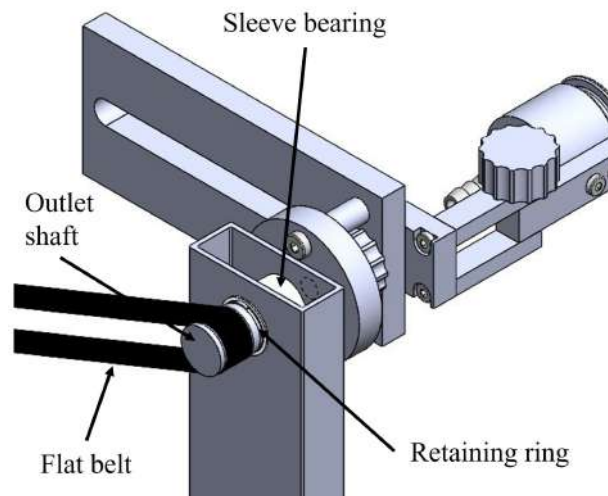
Flat belt connected to the outlet shaft allowing the alignment module on this side to rotate.
